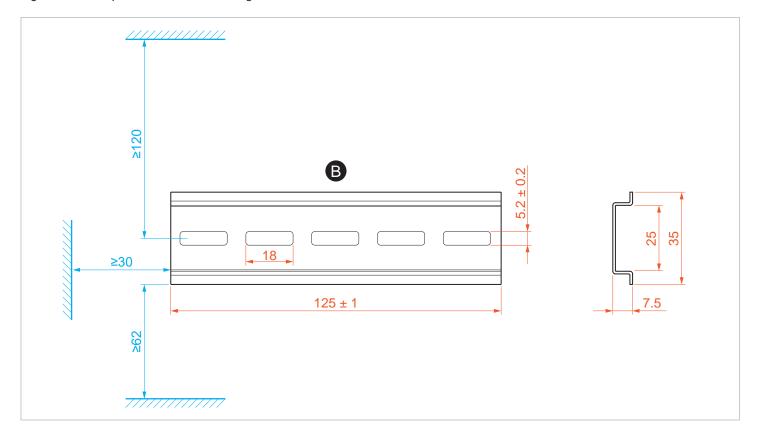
Dimensions and Mounting distances DIN rail (in mm)
